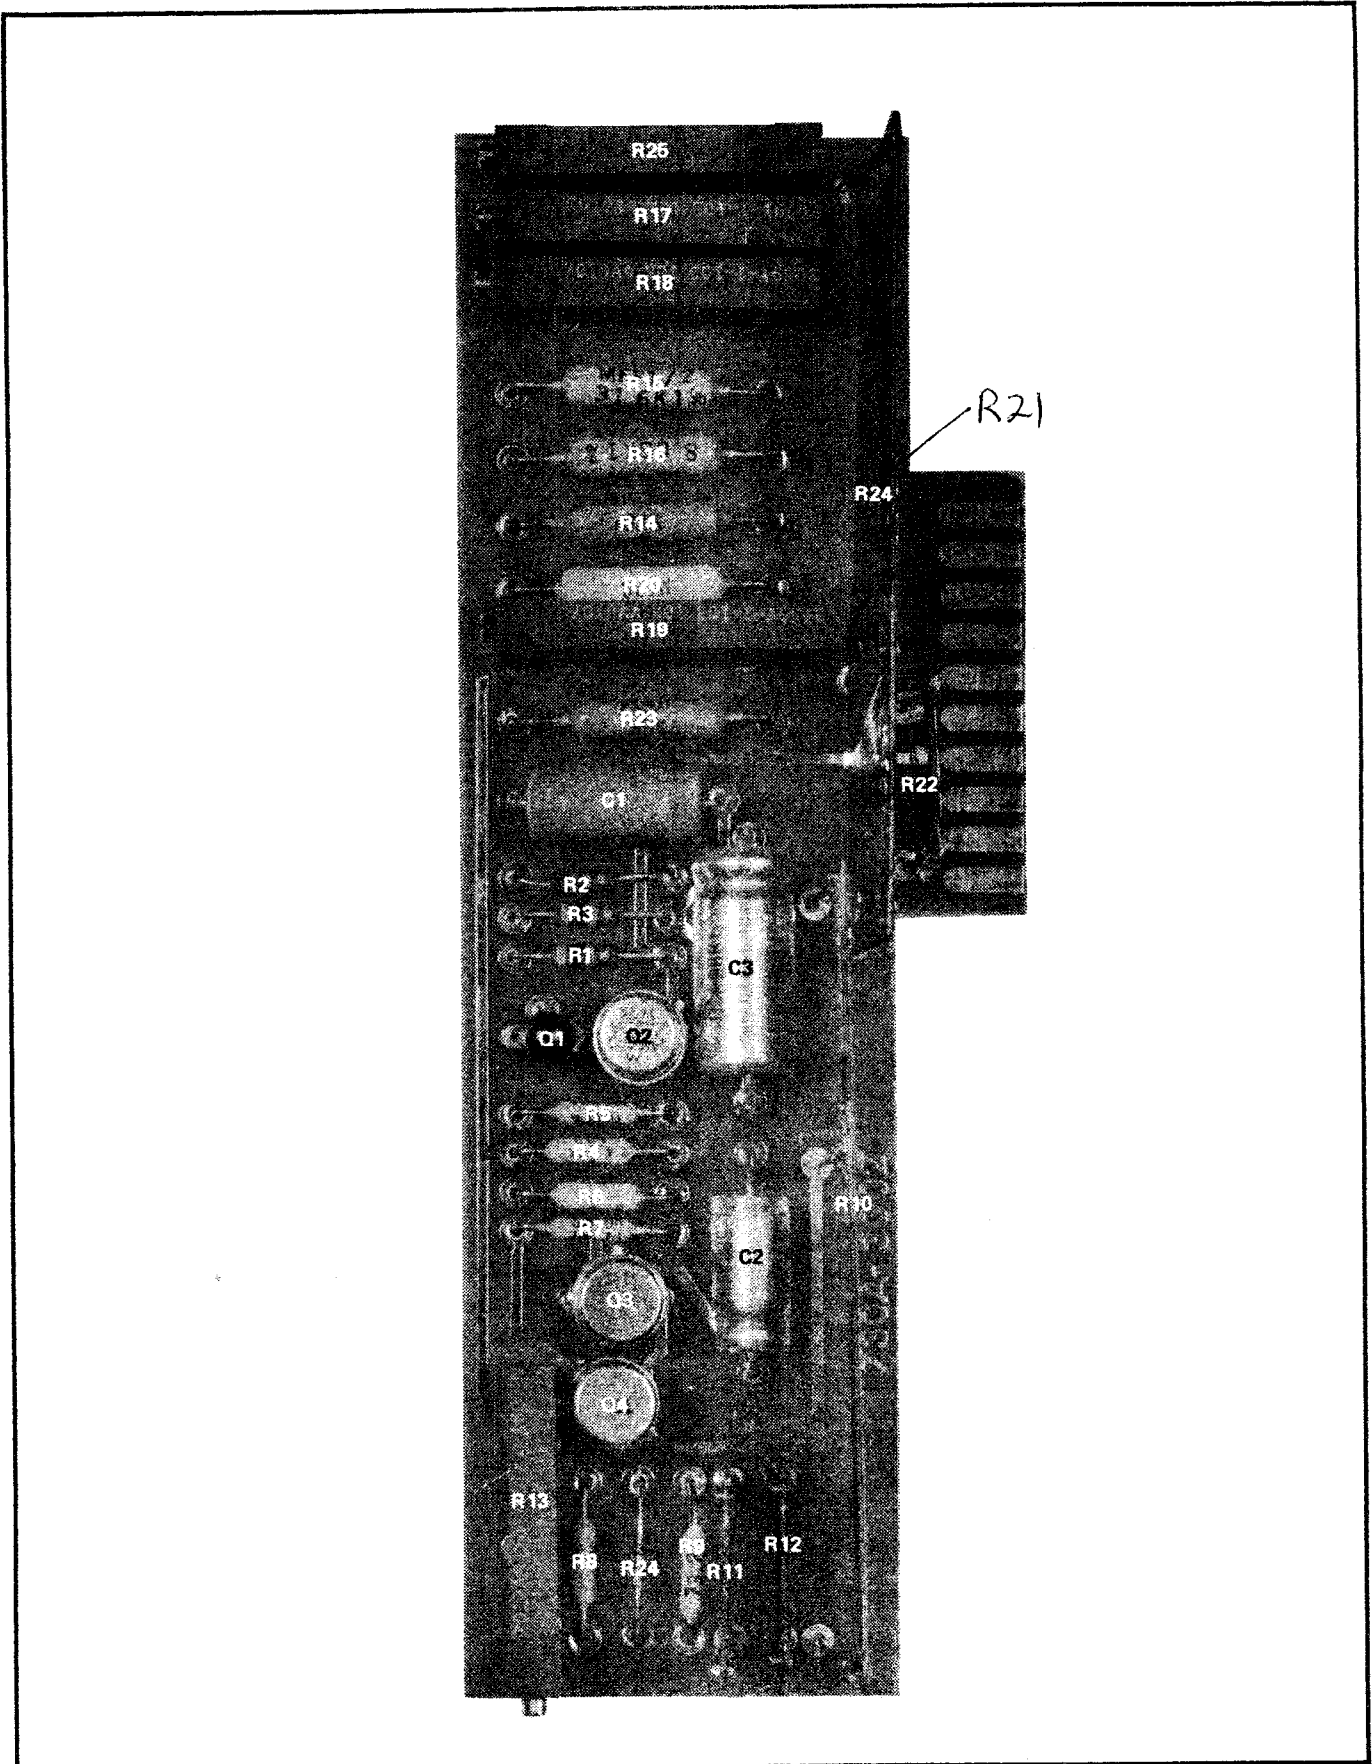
REFERENCE SUPPLY ASSEMBLY
